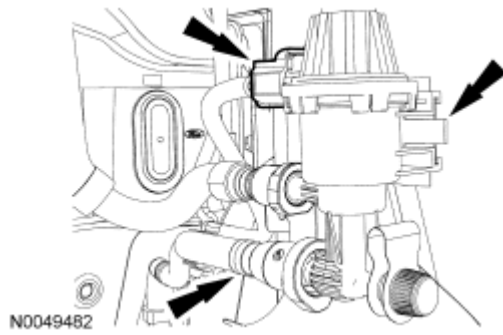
Disconnecting Lower EVAP Tube & Electrical Connector From EVAP Canister Purge Valve
